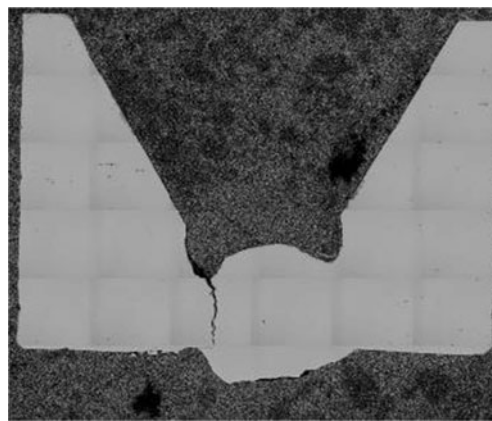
Typical weld bead geometry for sample deposited with a heat input in the lower quartile of the heat input range of interest. Deposition with a low preheat resulted in the formation of a weld with a produced weld toe and consequently a hydrogen crack
